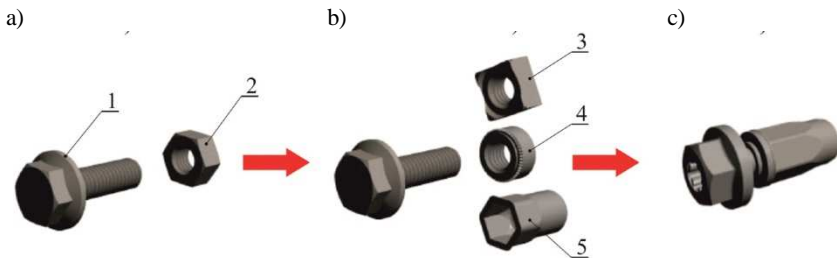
The thread fasteners development: a) the classic bolted joint, b) the combination of the bolts and the pressed elements, c) the solutions in the case of the construction with closed spaces; 1 – the bolt, 2 – the classic nut, 3-5 – the blind rivet nut
